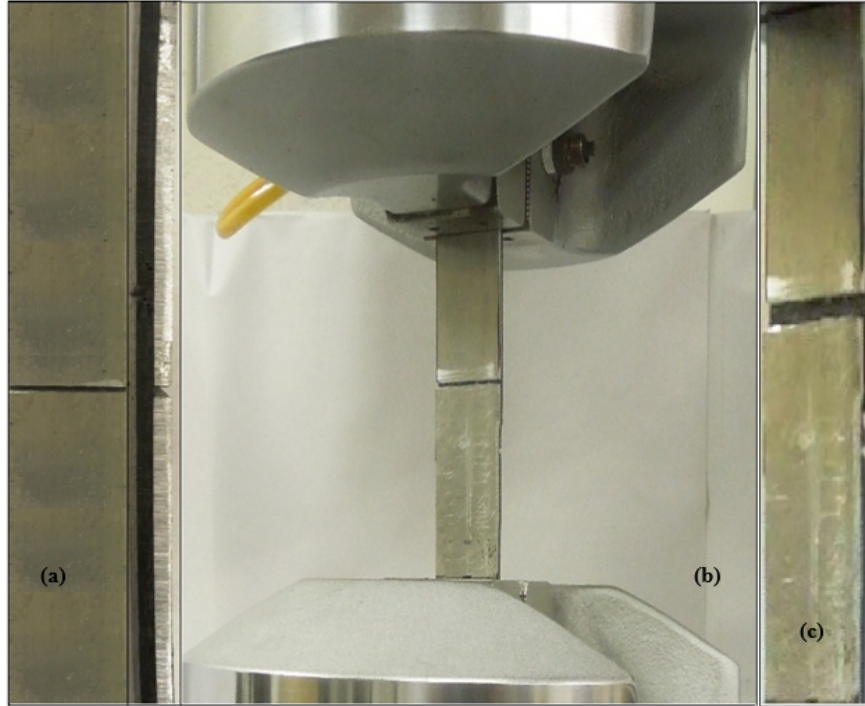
a) Double notch shear test coupon (b) coupon secured in MTS testing machine (c) damaged test coupon.
